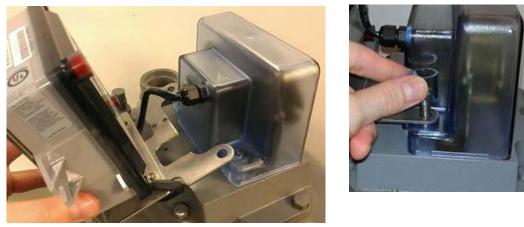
14. Install GPR Bracket, Screws and Tamper Cups
